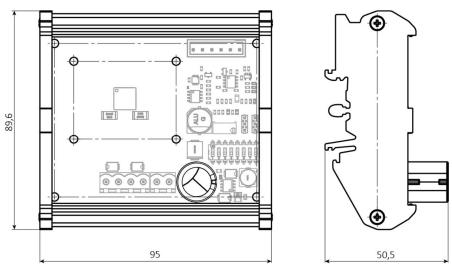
Dimensions of stepper motor driver SMD-1.6 carrier kit version
